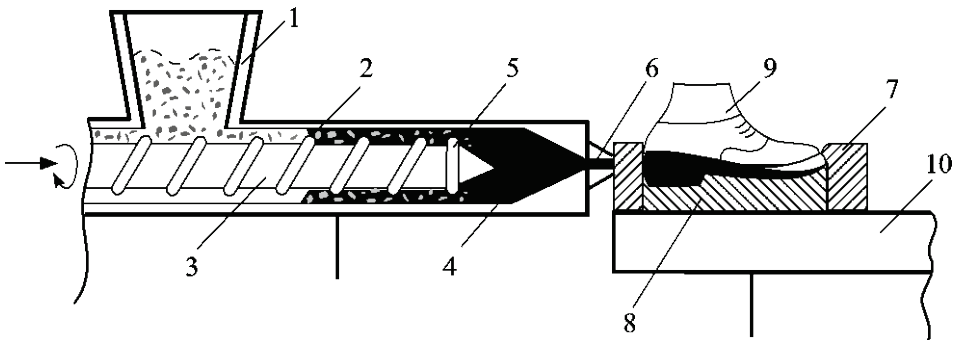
Scheme of injection molding of shoe products: 1 – hopper; 2 – material cylinder; 3 – screw; 4 – polymer; 5 – check valve; 6 – channel; 7 – matrix; 8 – punch; 9 – shoe; 10 – roundabout table [53]
